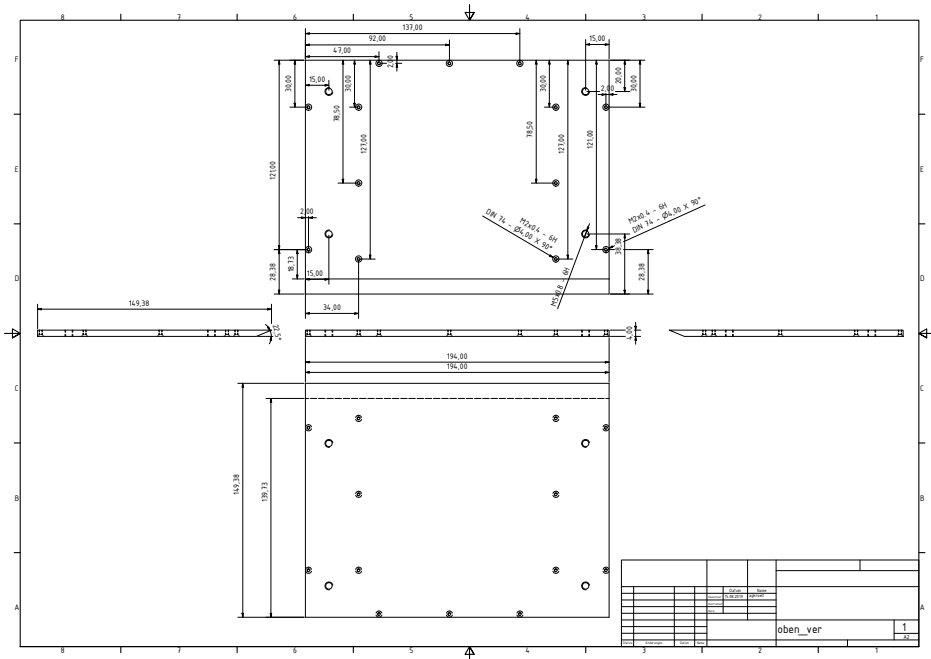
Technical drawing of the top plate of a box from the back part of the pair spectrometer.
